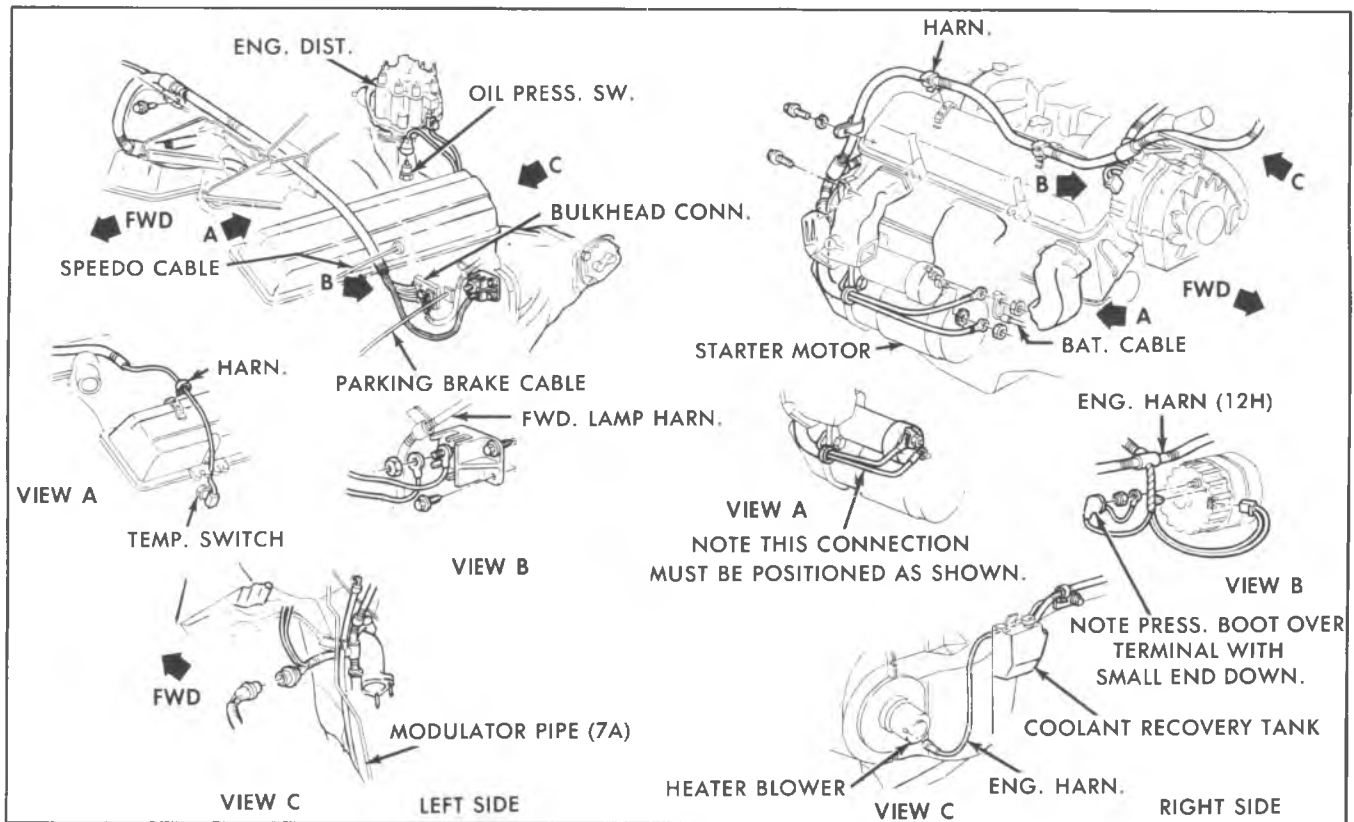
G-10 thru 30 Truck V-8 (LF4/LG9/LS9) Engine Wiring
